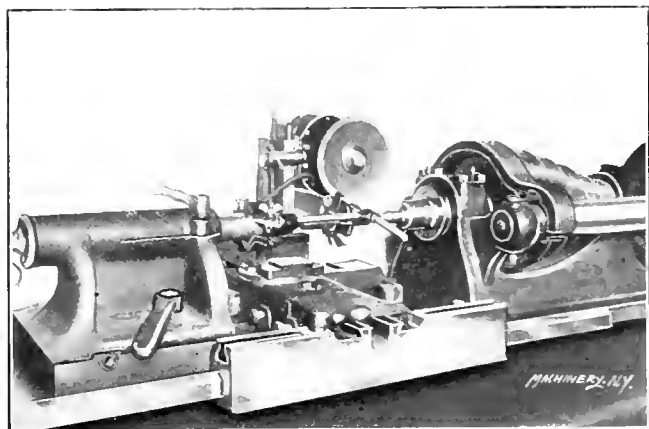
Sharpening a Gear Cutter in the Lathe with Tooth Rest clamped to the Tail-stock Spindle.
